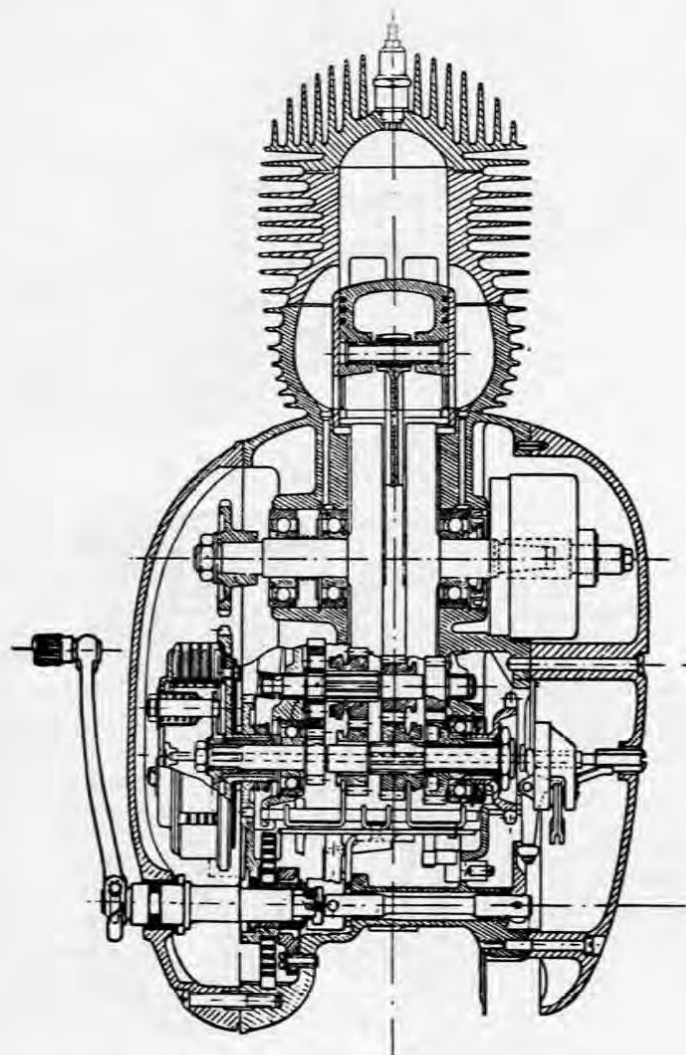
Sectional view of the Jawa 250 cu. cm engine.
